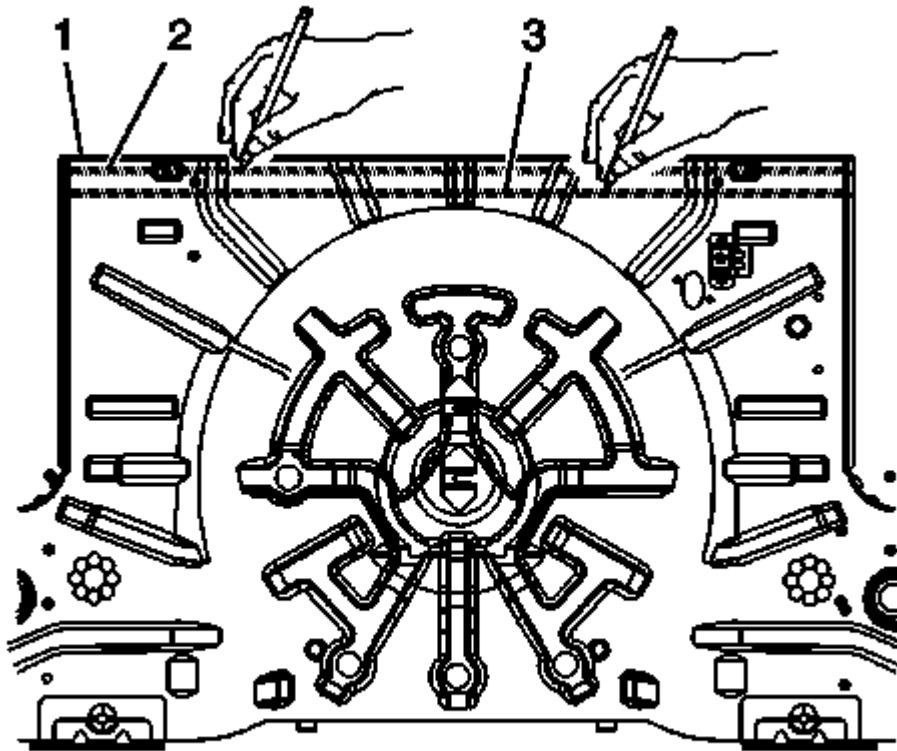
Marking Rear Compartment Floor Panel For Plug Welds
